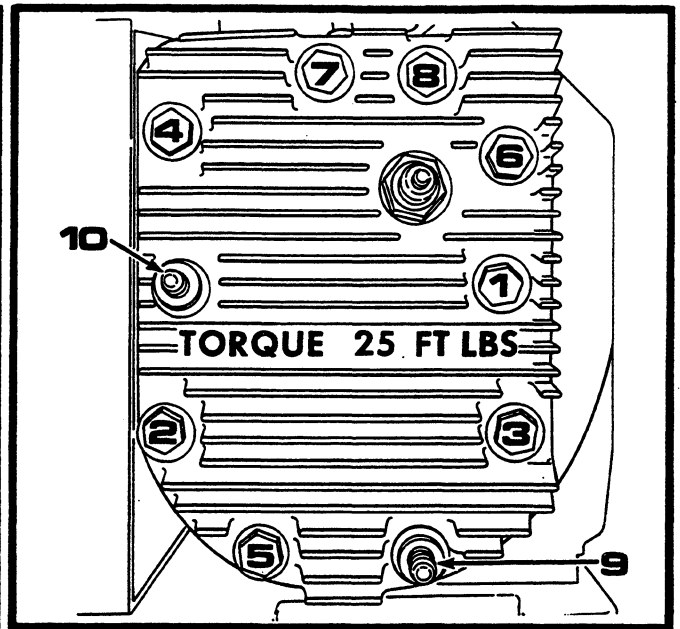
CYLINDER HEAD TIGHTENING SEQUENCE
